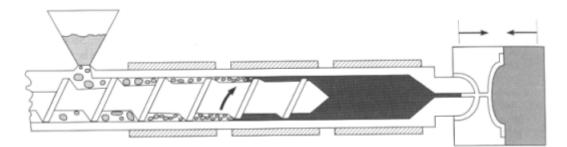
Layout of reciprocating screw and barrel in plastic injection molding machine [8].
